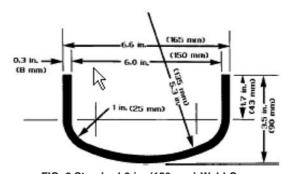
Standard 6 in. (150 mm) Weld Cap
